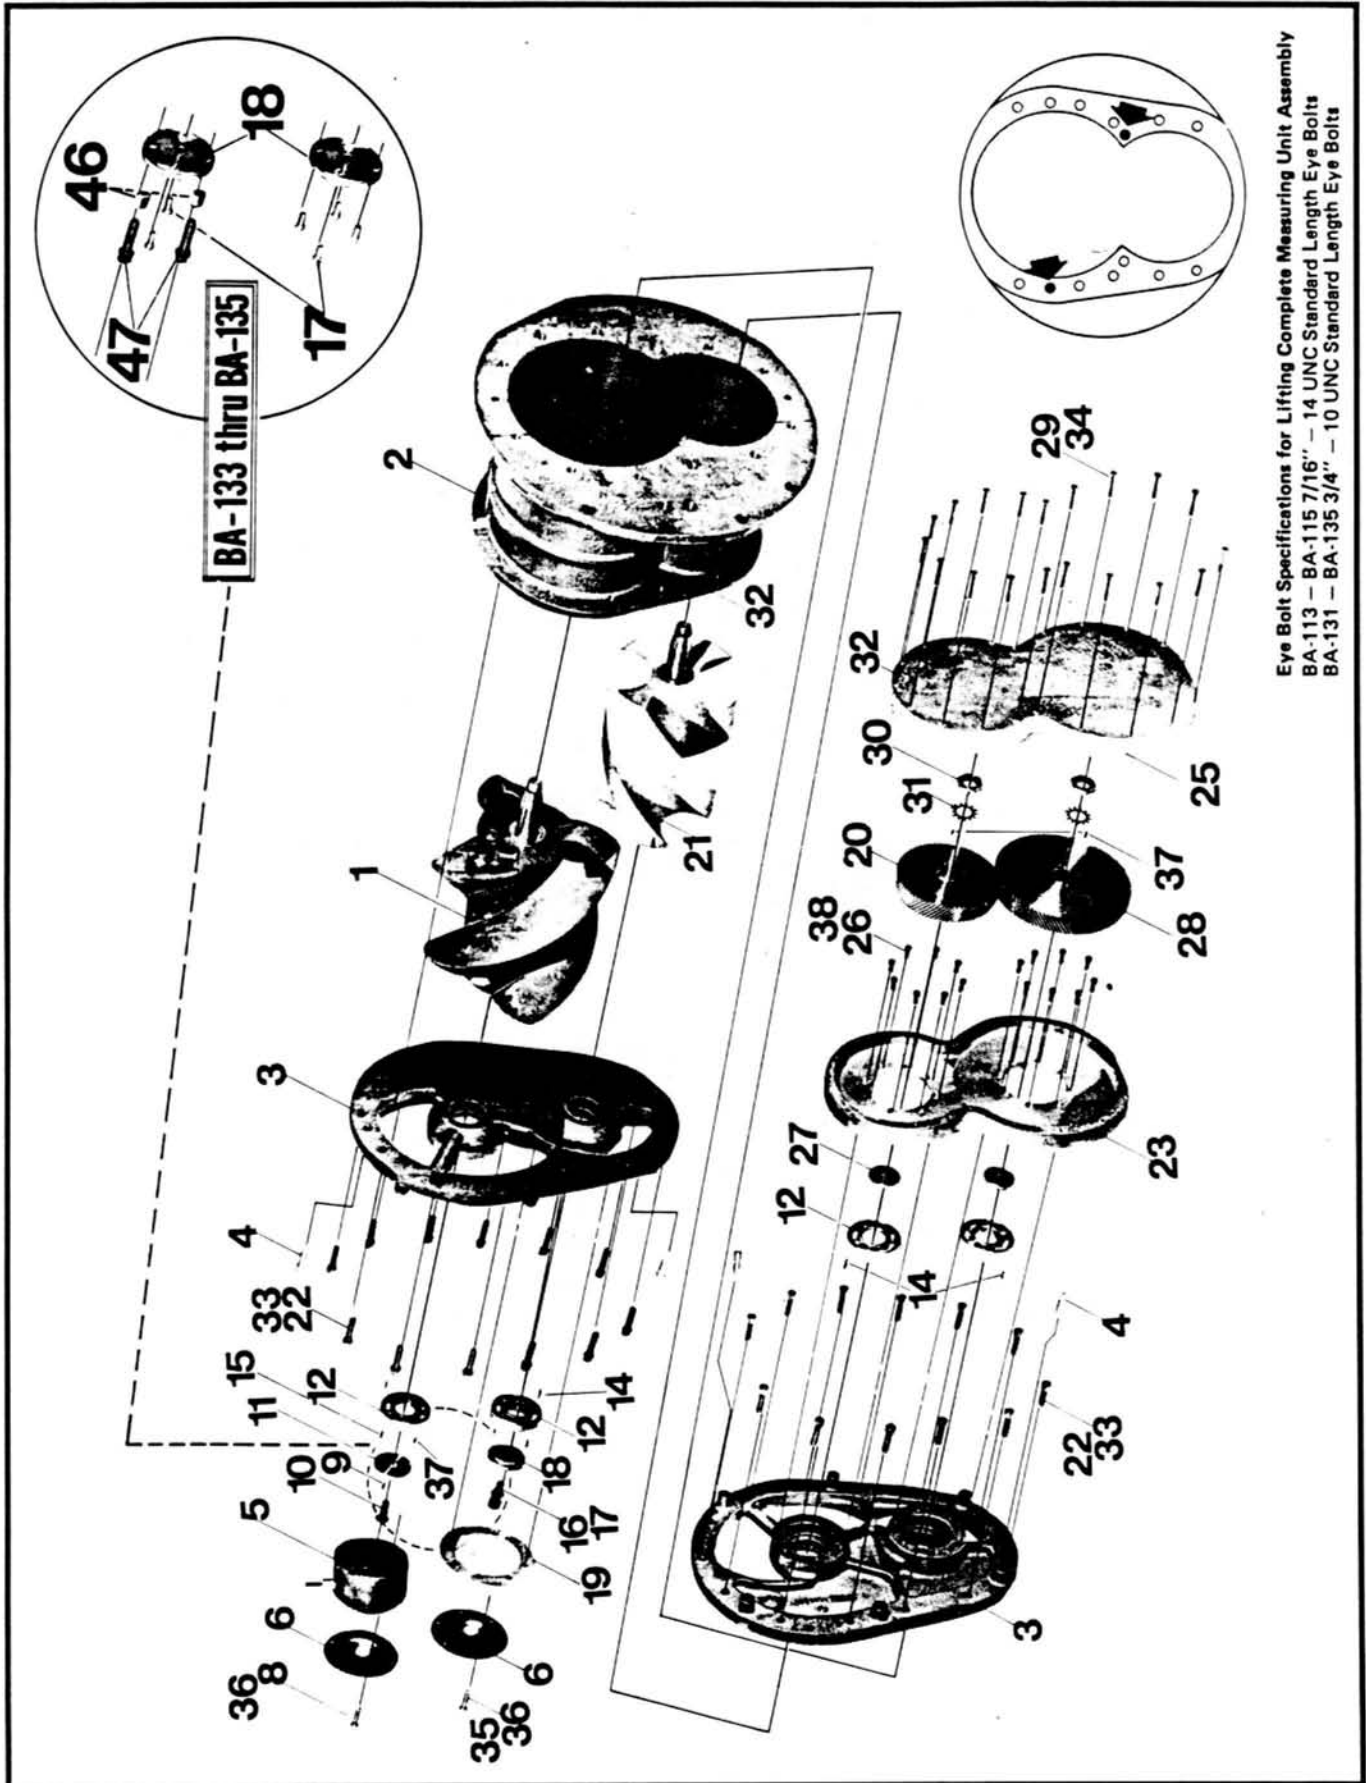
Complete Measuring Unit Assembly (113505-030 and 133505-030)
